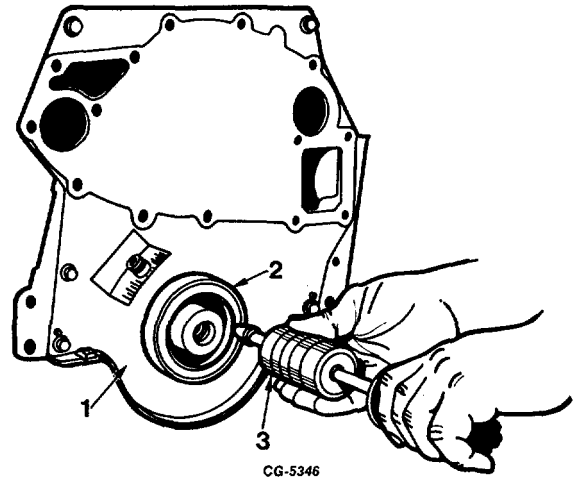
Front Cover Oil Seal Removal with Cover Installed. Using SE-2091 Puller
